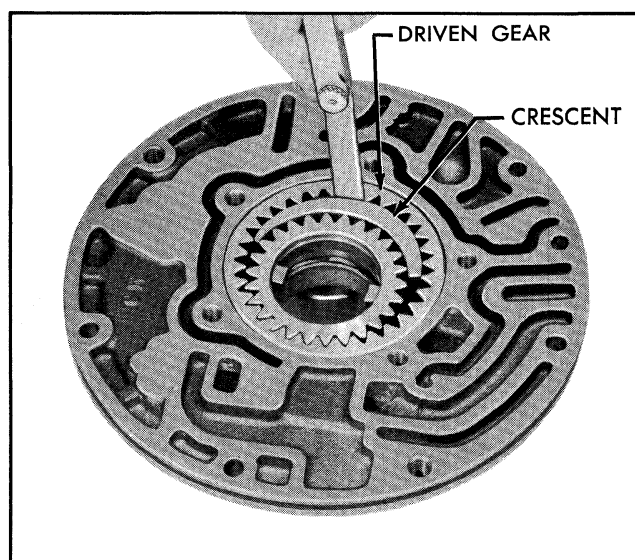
B-106 Checking Driven Gear to Crescent Clearance
